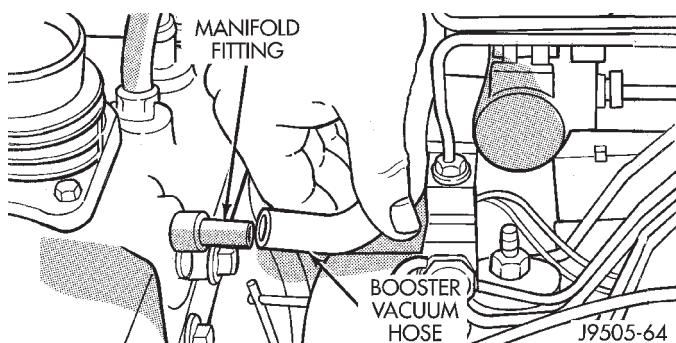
Booster Vacuum Hose Removal/Installation (From Manifold Fitting)
